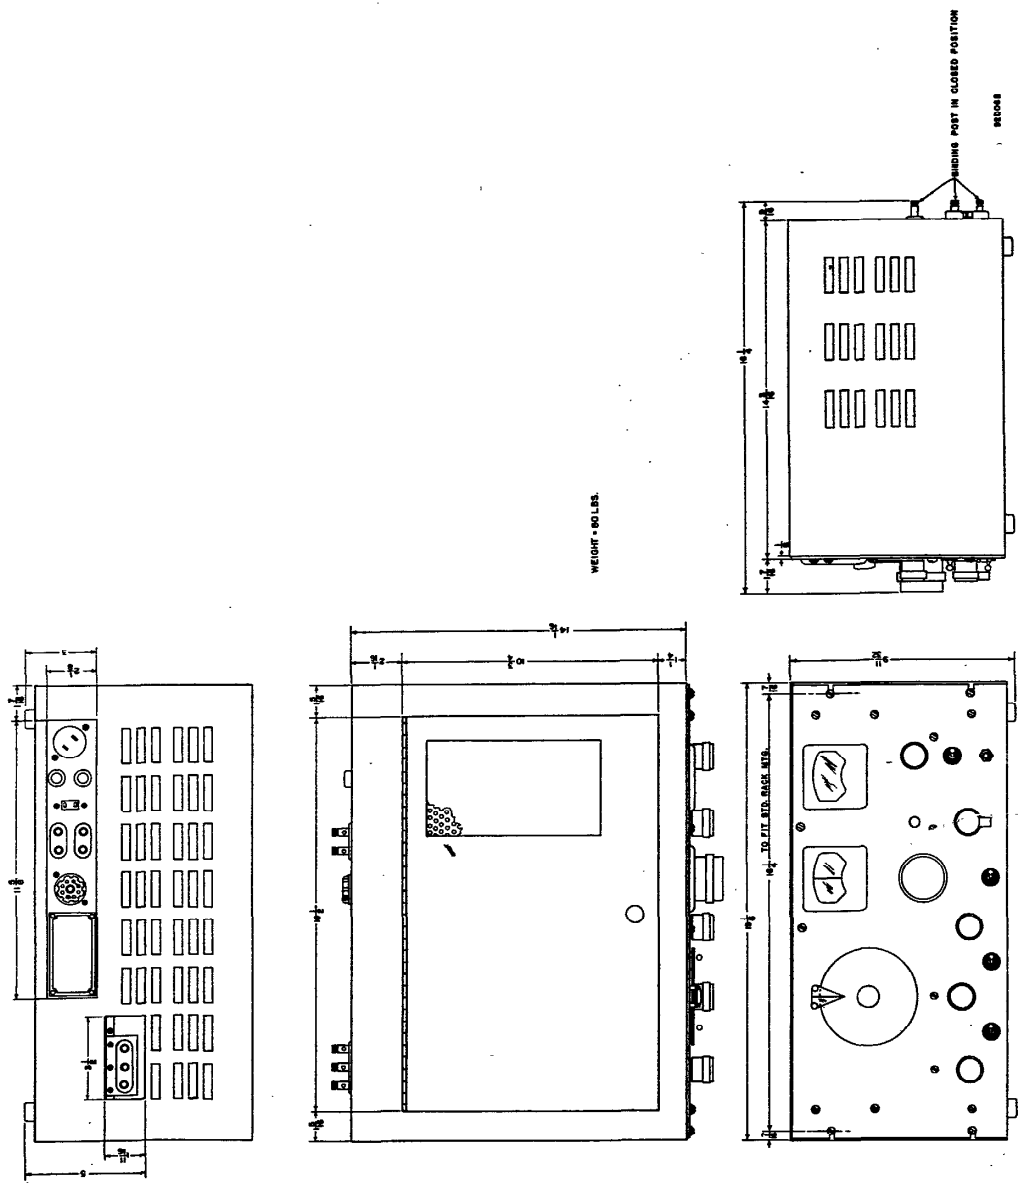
Radio Receiver Model S-37, outline dimensions.
